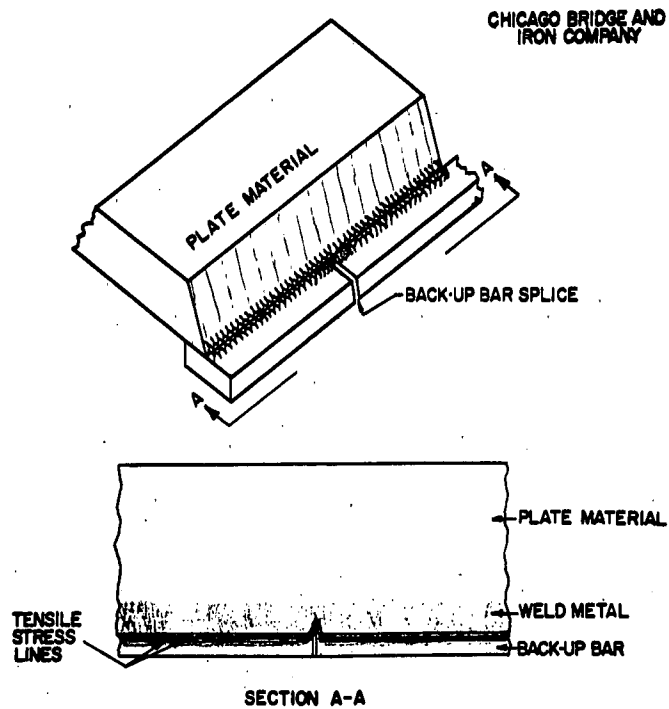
NOTCH FAILURE DEMONSTRATION SKETCH
